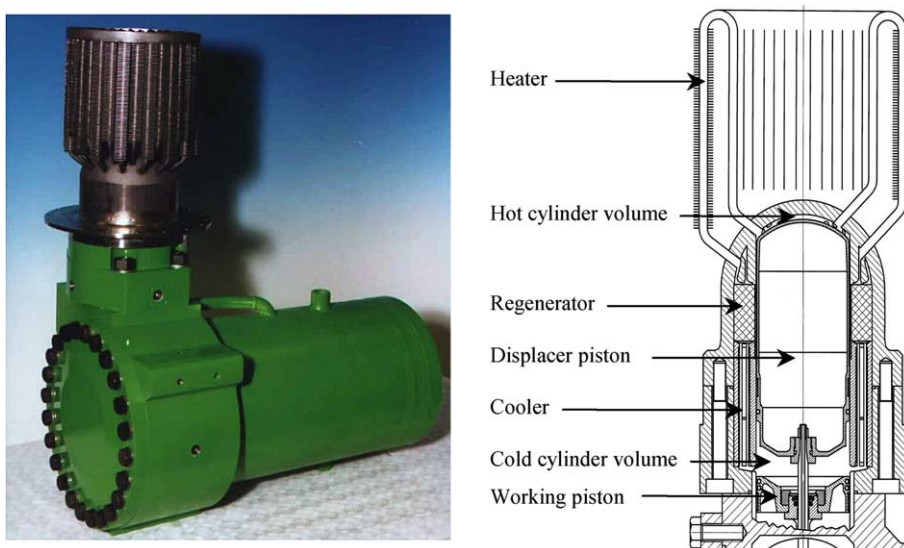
The SM5 Stirling engine with exposed heater (left) and a drawing of the cylinder region of the engine.
